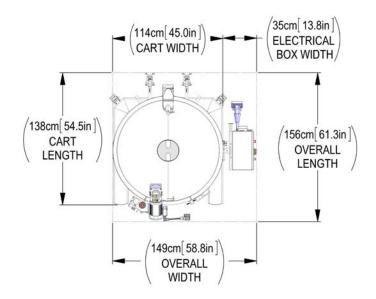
1,000 L S.U.M. dimensions (top view).
